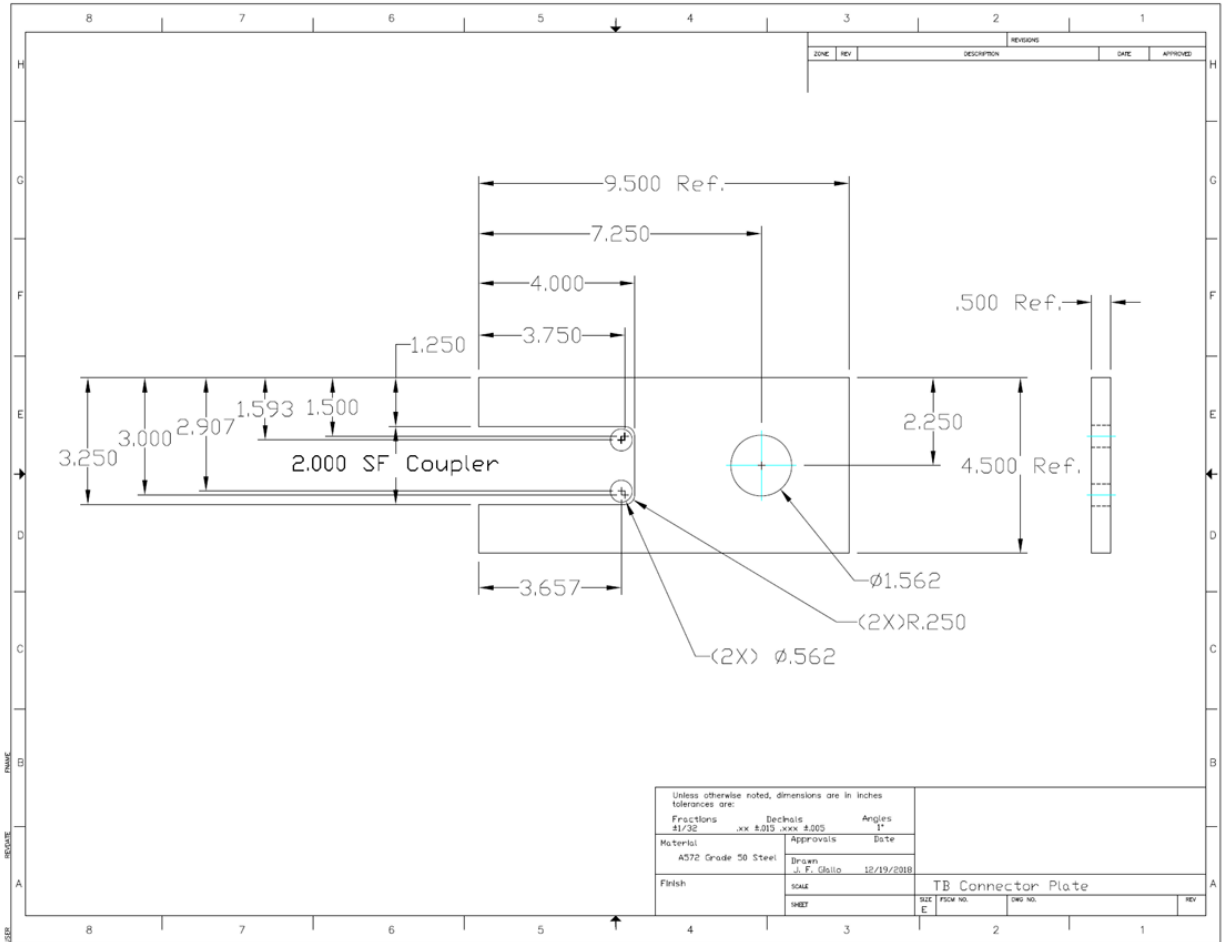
Turnbuckle (TB) plate machinist as-built drawing.
